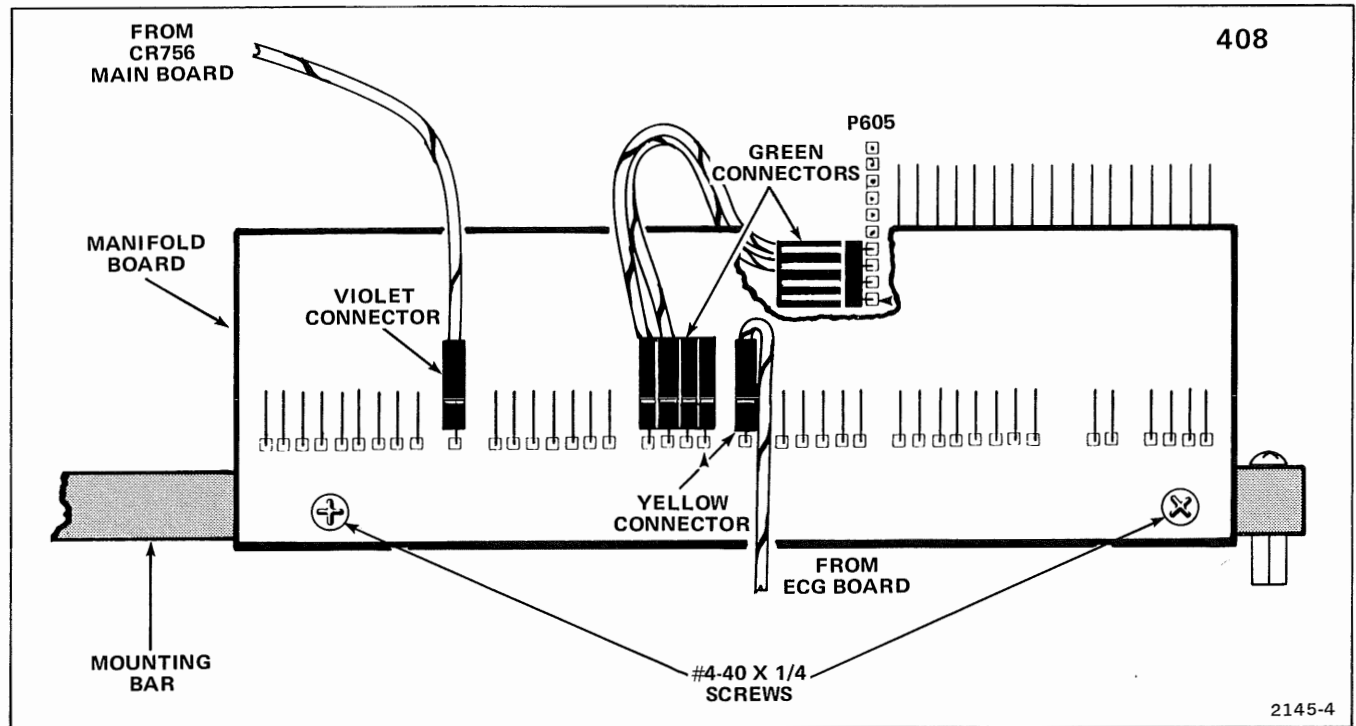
Installing Manifold Board and connecting cable in 408.
